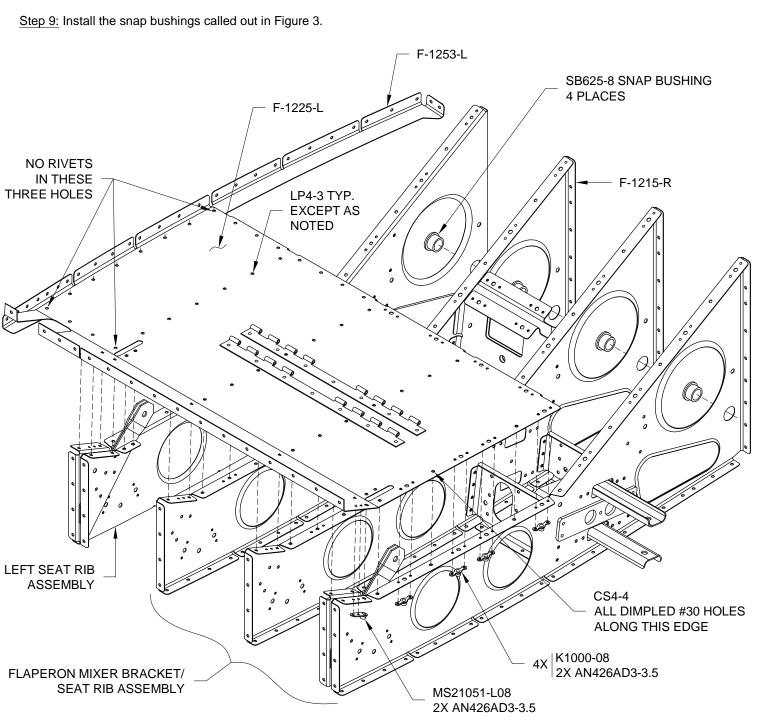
LEFT SEAT FLOOR ASSEMBLY
